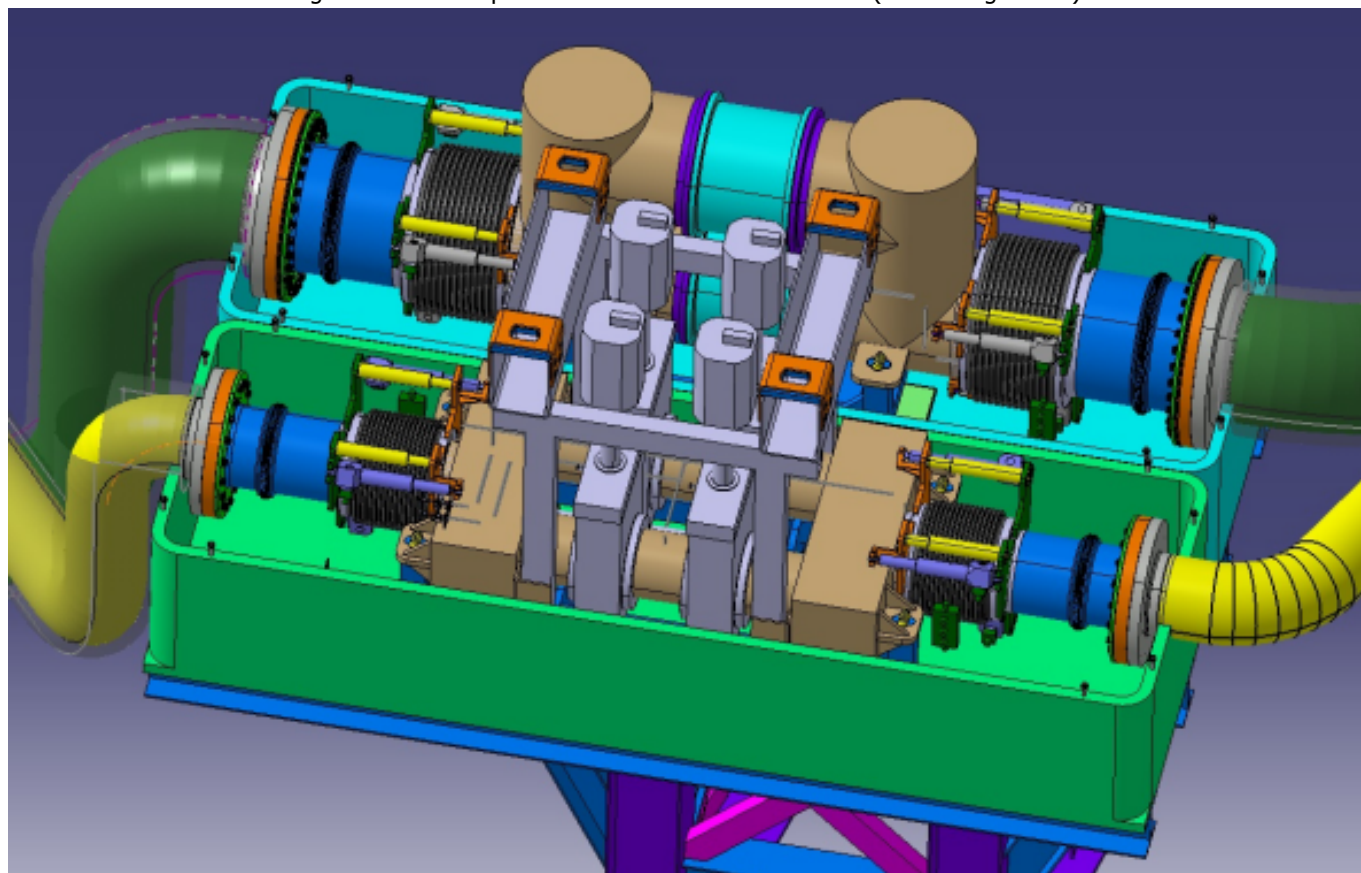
RD/BLV assy overall view (upper thermal shield removed)
